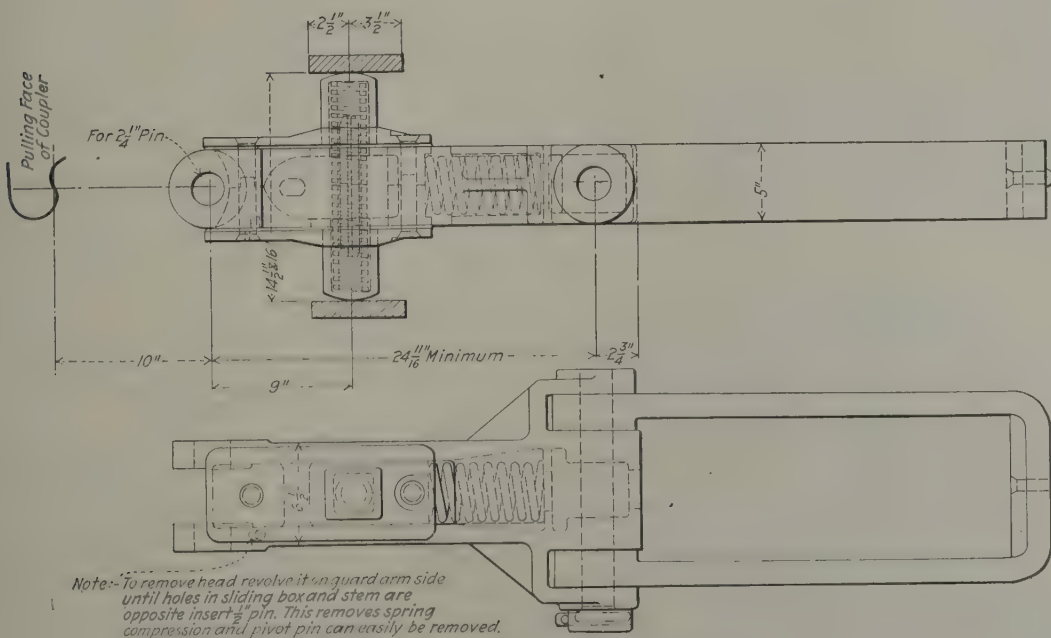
Coupler Stem with Quadruple Shear End for Pitt Passenger Coupler.
